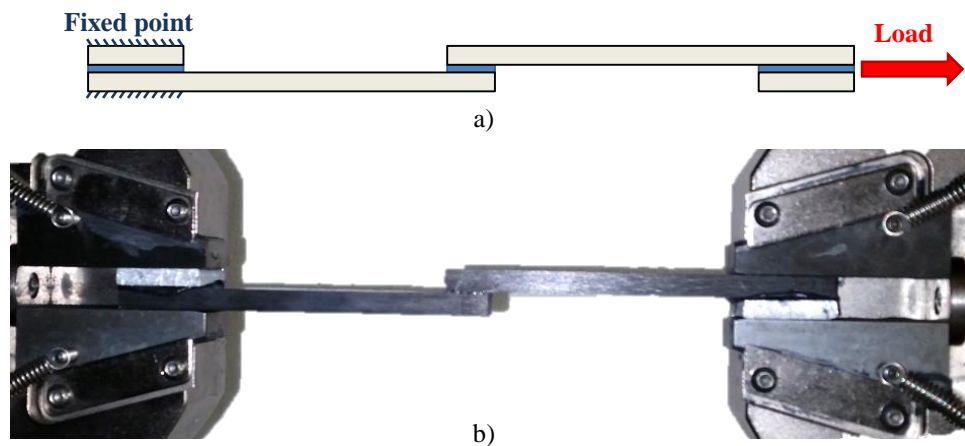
Loading of the single lap joints; a) schematic SLJ test b) loading set-up
